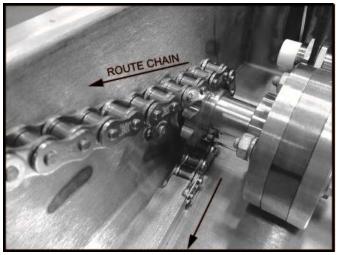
ROUTE CHAIN ACTUATOR ASSEMBLY (LH SIDE SHOWN)
